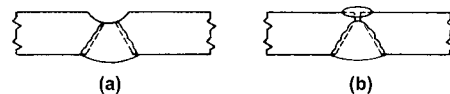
Use of back gouging for complete penetration. (a) Complete penetration of weld with back gouging. (b) Incomplete penetration of weld prior to back gouging
